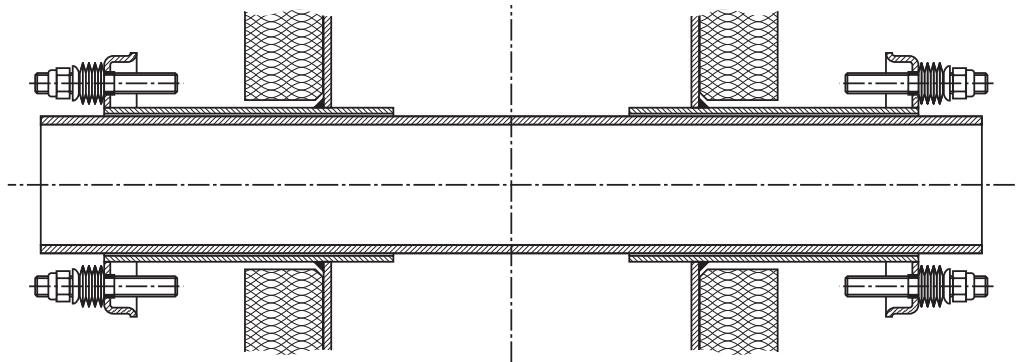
Auxiliary tube for aligning the flanges in measuring paths of up to 2 m (6.5 ft)
